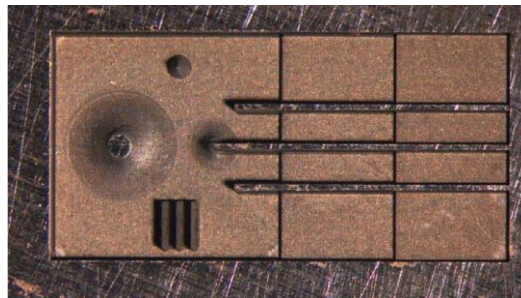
Micro structured mould in mould steel (dimension 4x8 mm<sup>2</sup>)
